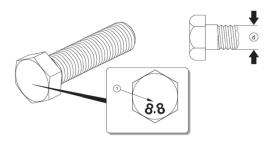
Bolt with metric thread, (1) resistance class, (d) thread diameter.
